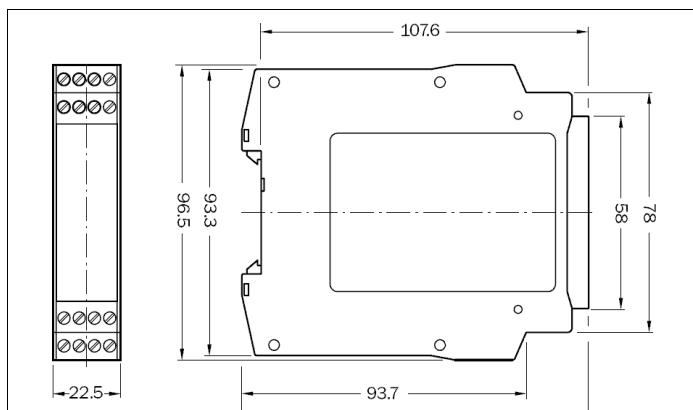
Dimensional drawing UE43-2MF with removable terminals (mm)
